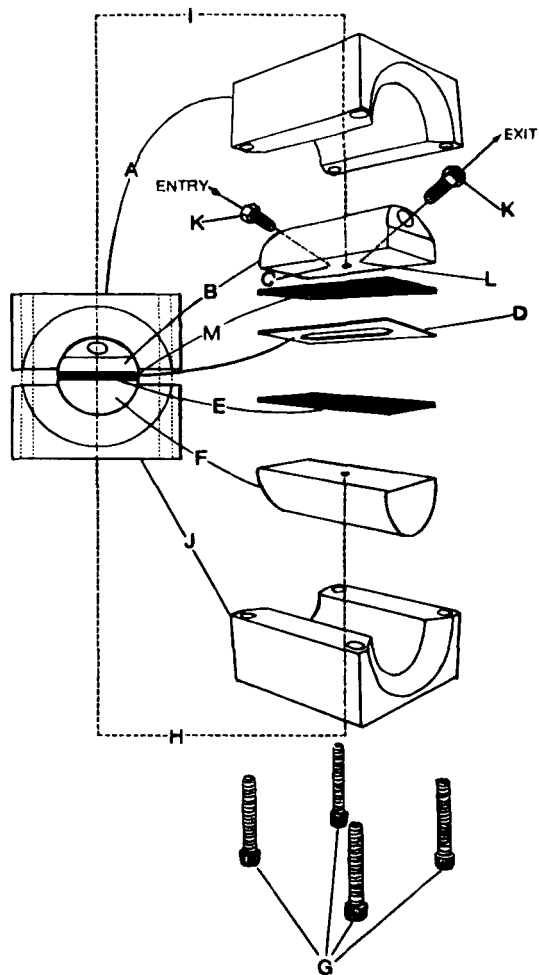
Hemicylindrical coulometric TLED cell, end view at left, exploded view at right, (A) and (J) upper and lower yokes machined from polyvinyl chloride for holding together hemicylindrical cell, (B) and (F) upper and lower cell halves machined from Kel-F, (C) entry port into cell's inner channel, (D) PTFE spacer, (E) LTIC plate working electrode, (G) stainless steel screws for holding yokes together, (H) electrical contact to LTIC plate working electrode, (I) electrical contact to combined reference-auxiliary LTIC plate electrode, (K) Altex 1/16 inch fittings, (L) exit from cell's inner channel, (M) LTIC plate combined reference-auxiliary electrode.
